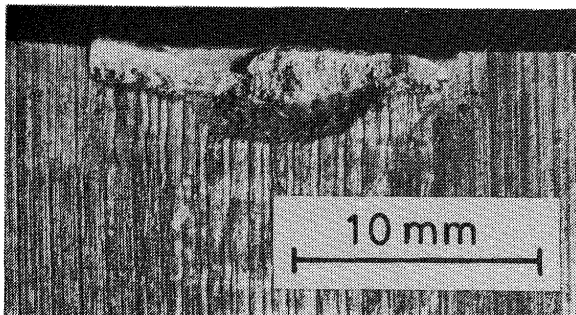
Artificially fractured surface containing weld cold crack (black part) of specimen preheated to 100°C
